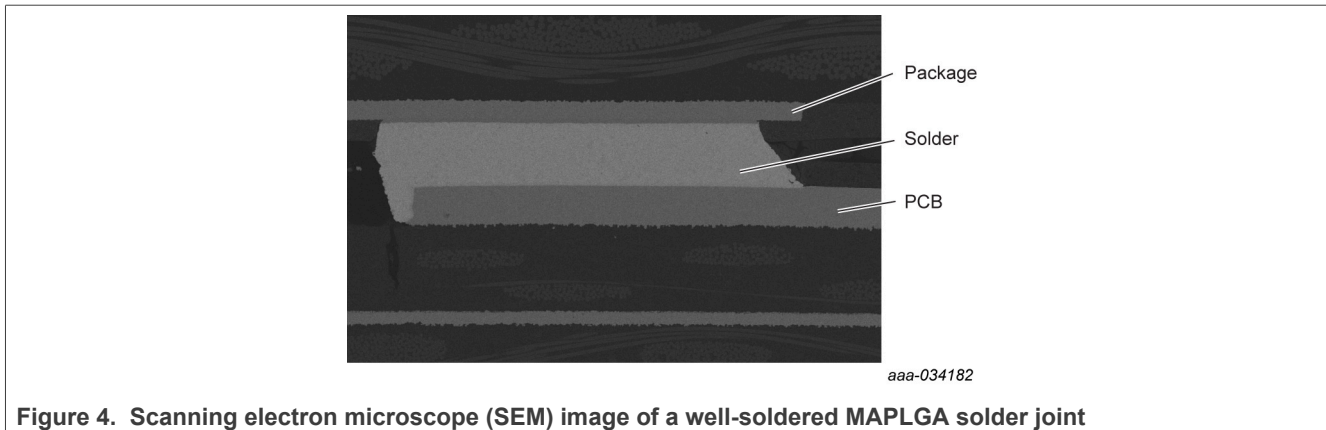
Scanning electron microscope (SEM) image of a well-soldered MAPLGA solder joint
